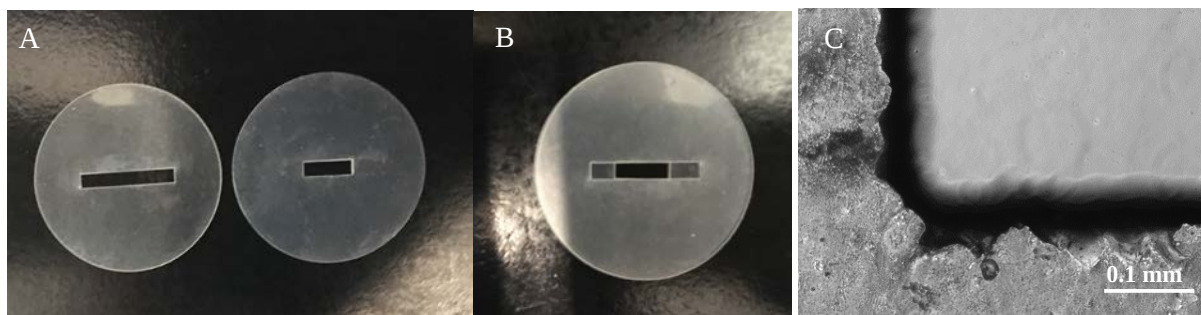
Laser cut gaskets for flow chamber geometry. A: Geometry of thinner top gasket (left) and thicker bottom gasket (right). B: Assembled gaskets. C: Phase microscopy image of laser cut gasket at 20X magnification. The hole in the upper right is cut to a high resolution with little debris.
